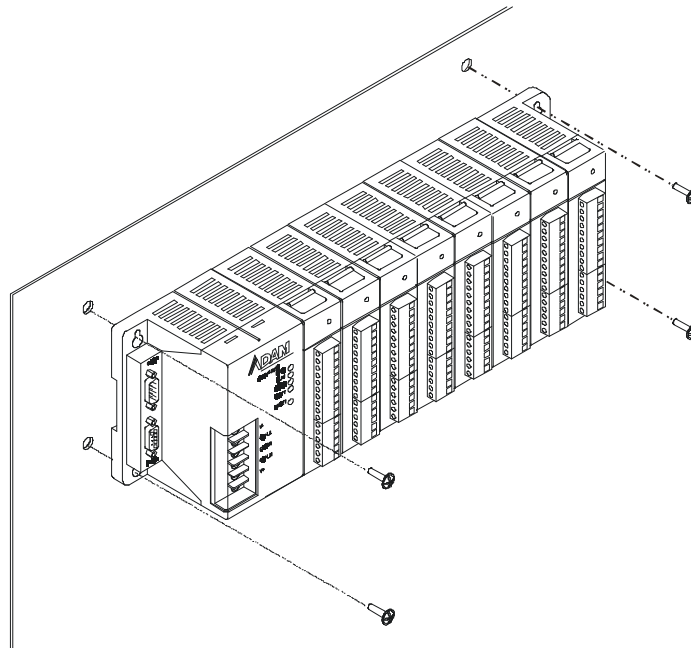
ADAM-5000/TCP panel mounting screw placement
